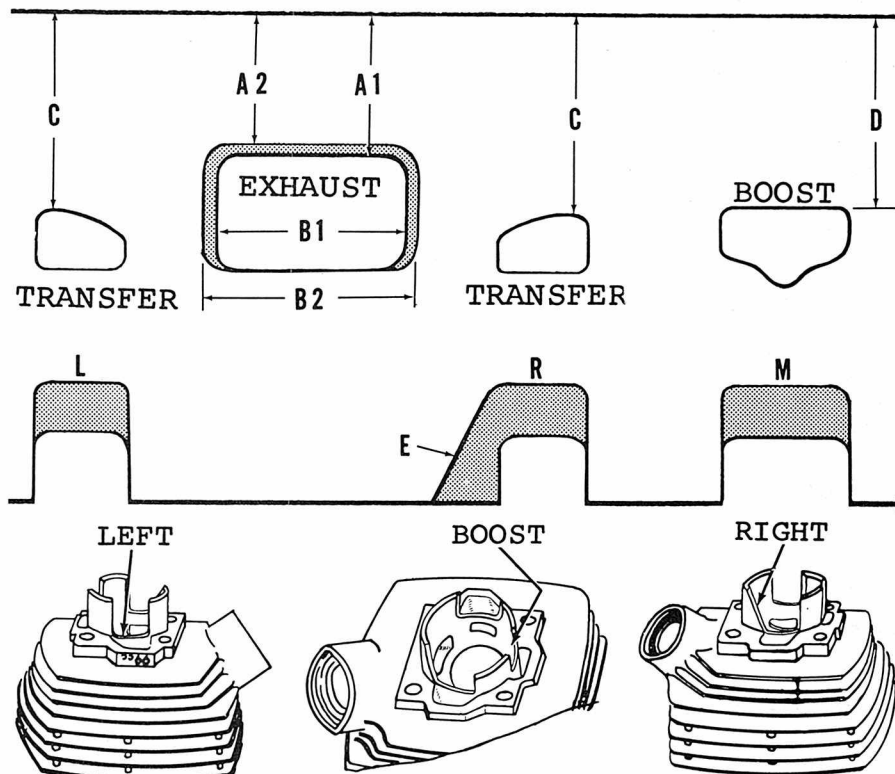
Basic port pattern of cylinder may be seen in these drawings. Cut-outs for transfer and boost passages should be enlarged and matched to openings in crankcase to eliminate restrictions
